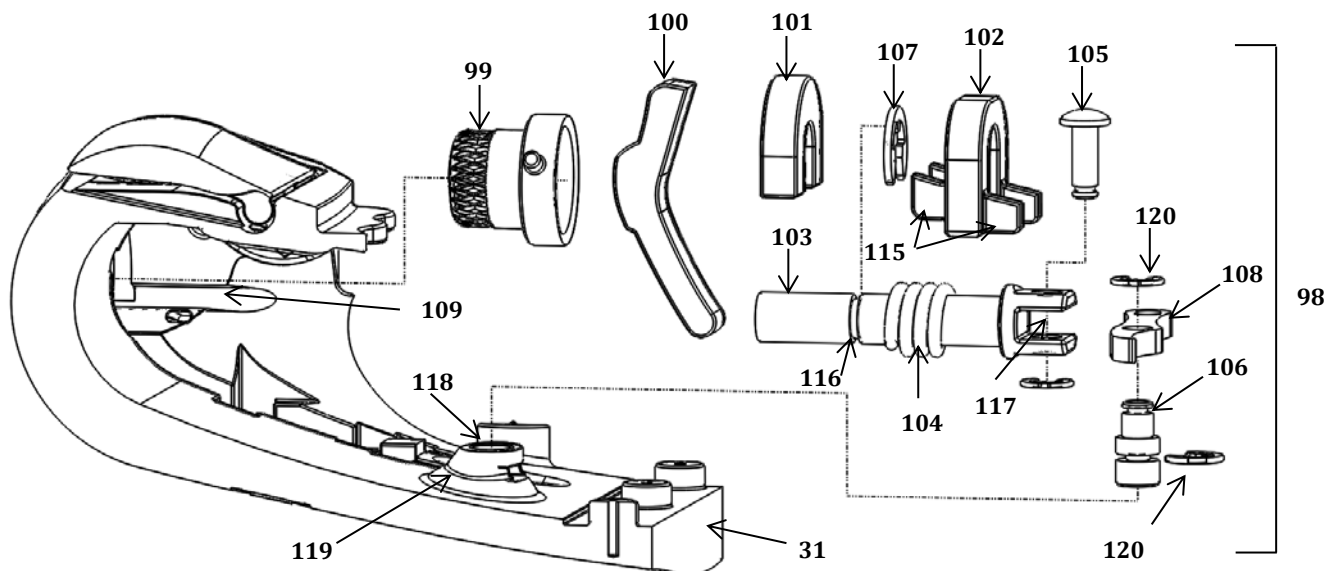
Postero-lateral exploded section view of the pawl engagement mechanism
